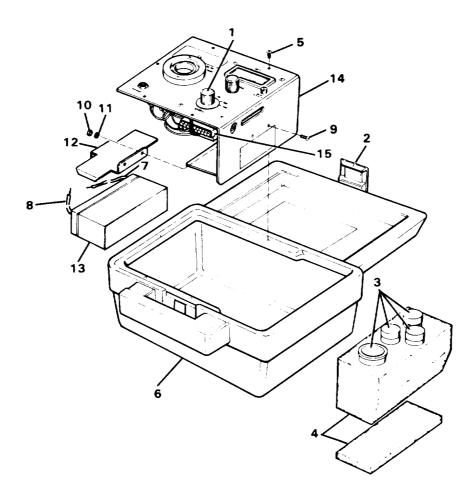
Portable Turbidity Meter (sheet 1 of 2)
